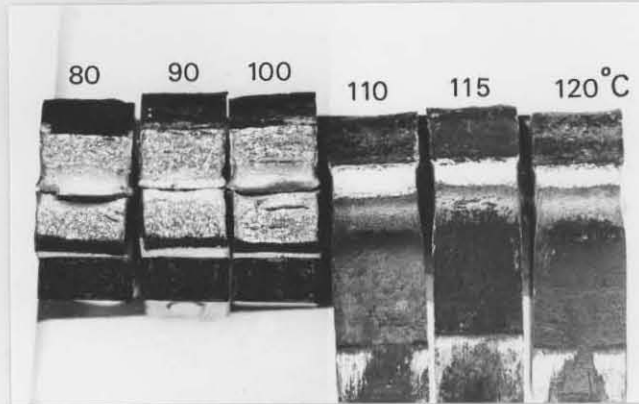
Fracture surfaces of tempered bead-on-plate 3CR12 bent specimens, welded with an AISI 316L filler metal. The test temperatures ($^{\circ}\text{C}$) are indicated.
